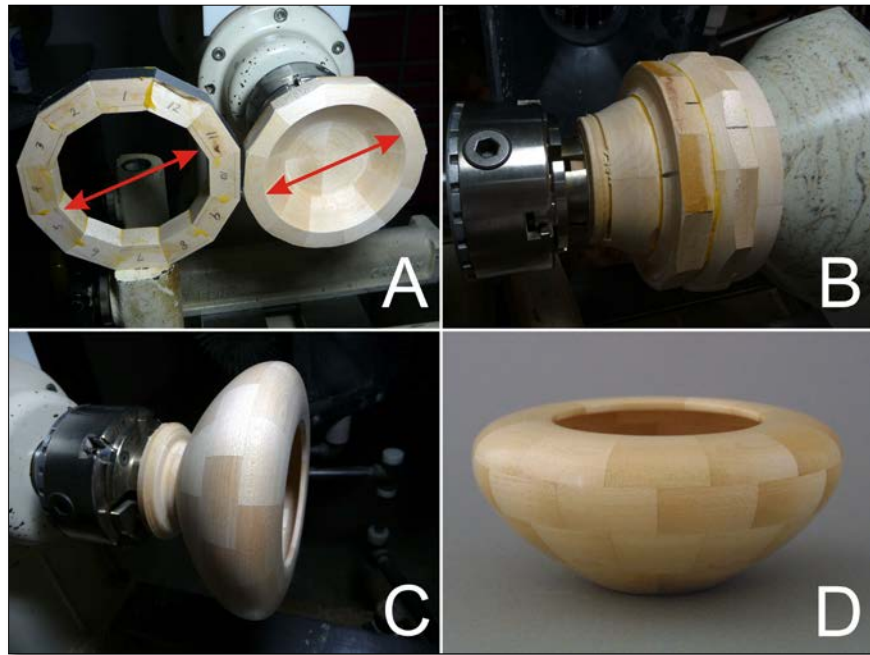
Assembling all rings and finish turning. A: Cut away the inside of the smaller ring - easier to true up; B: Glue all rings together concentrically using the centering cone; C: Finish-turn the outside and inside; D: Completed bowl.
